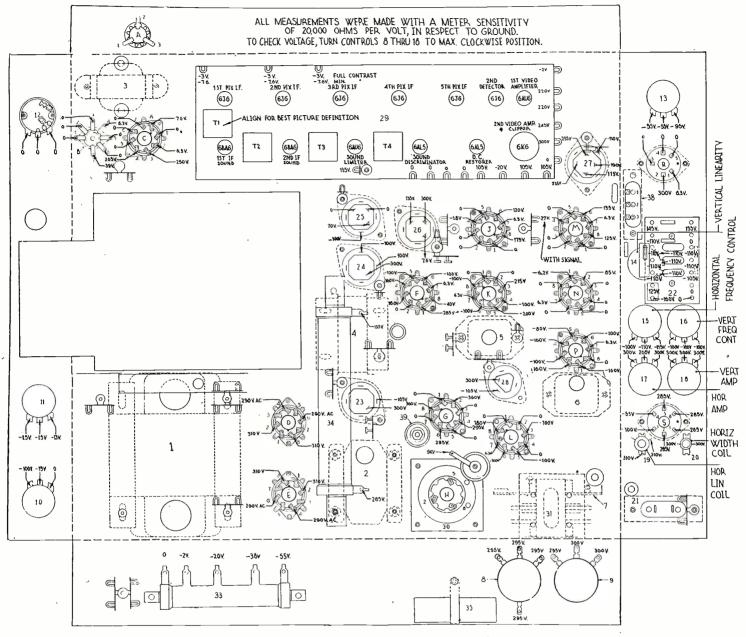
Voltage chart and parts placement of Television Assembly kit.
